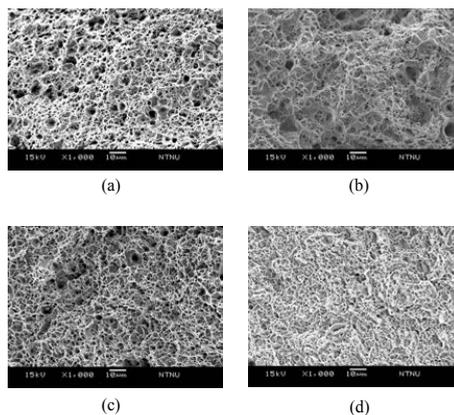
Fracture surface of A, B, C and D weld.
